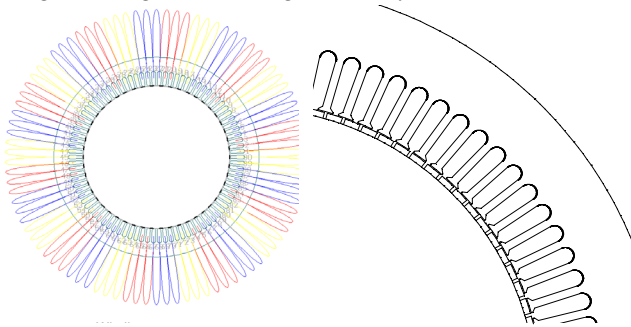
(a) Winding arrangement and (b) stator cross section.
